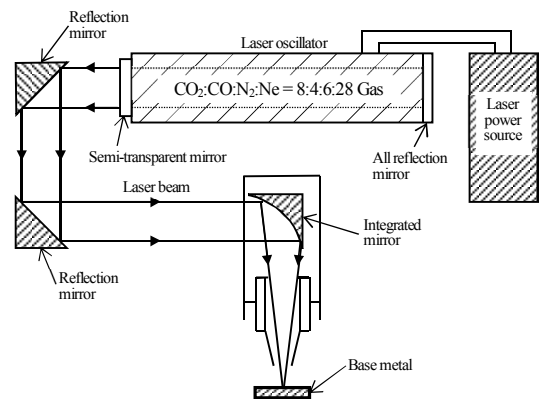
Schematic illustration of CO₂ laser welding machine.
